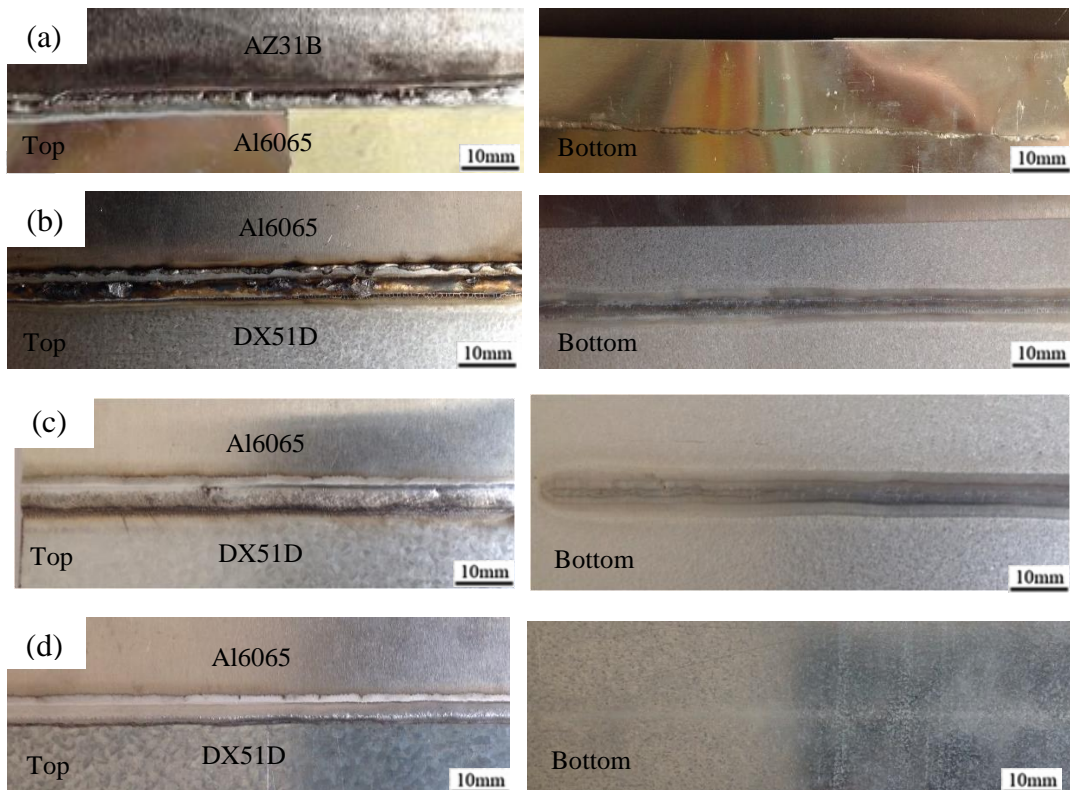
Macro-photographs of the welds in different welding parameters.
